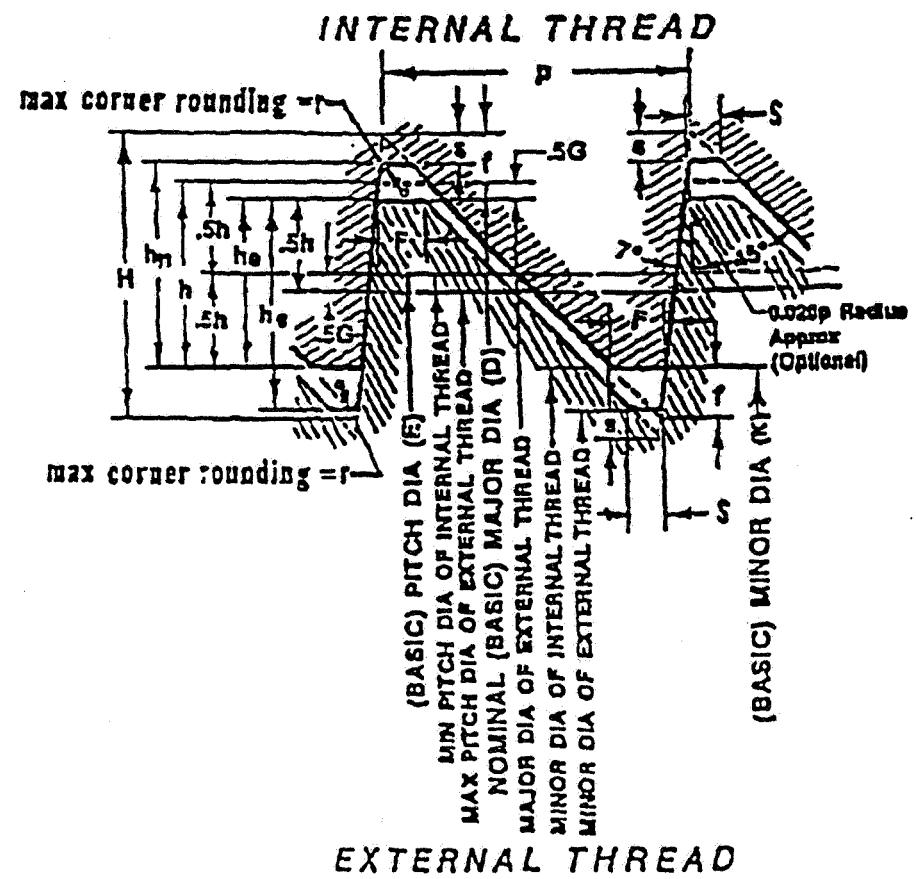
FORM OF 7°/45° BUTTRESS THREAD WITH 0.60 BASIC HEIGHT OF THREAD ENGAGEMENT AND FLAT ROOT
